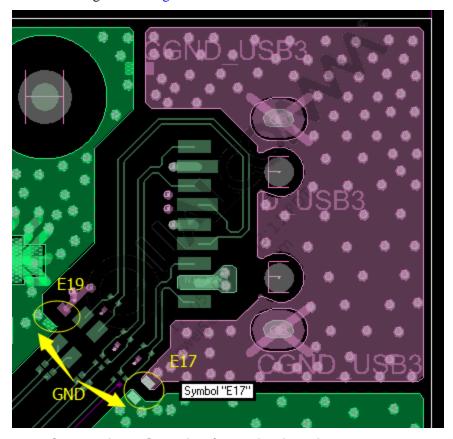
Connecting USB shield/chassis pins directly to board's GND
